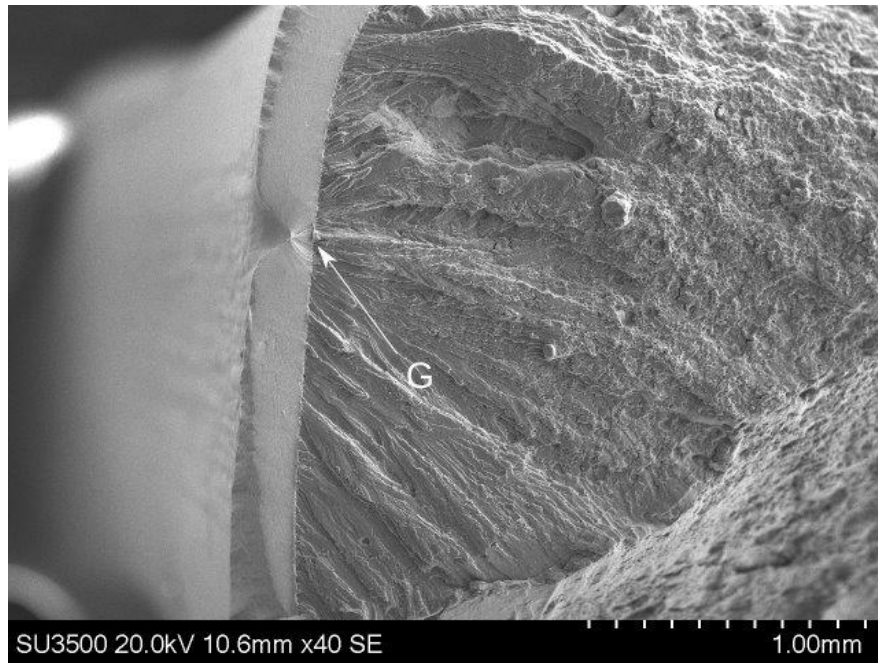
Indentation at location G in the coating of the fracture surface of Specimen H4.
